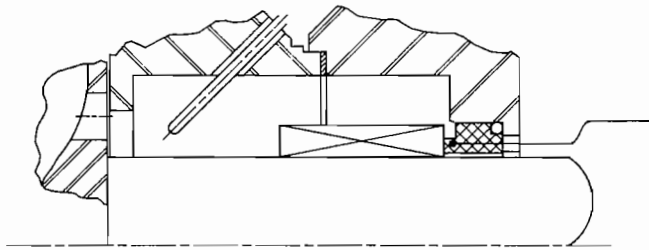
Enlarged Cylindrical Seal Chamber, Pump B.
